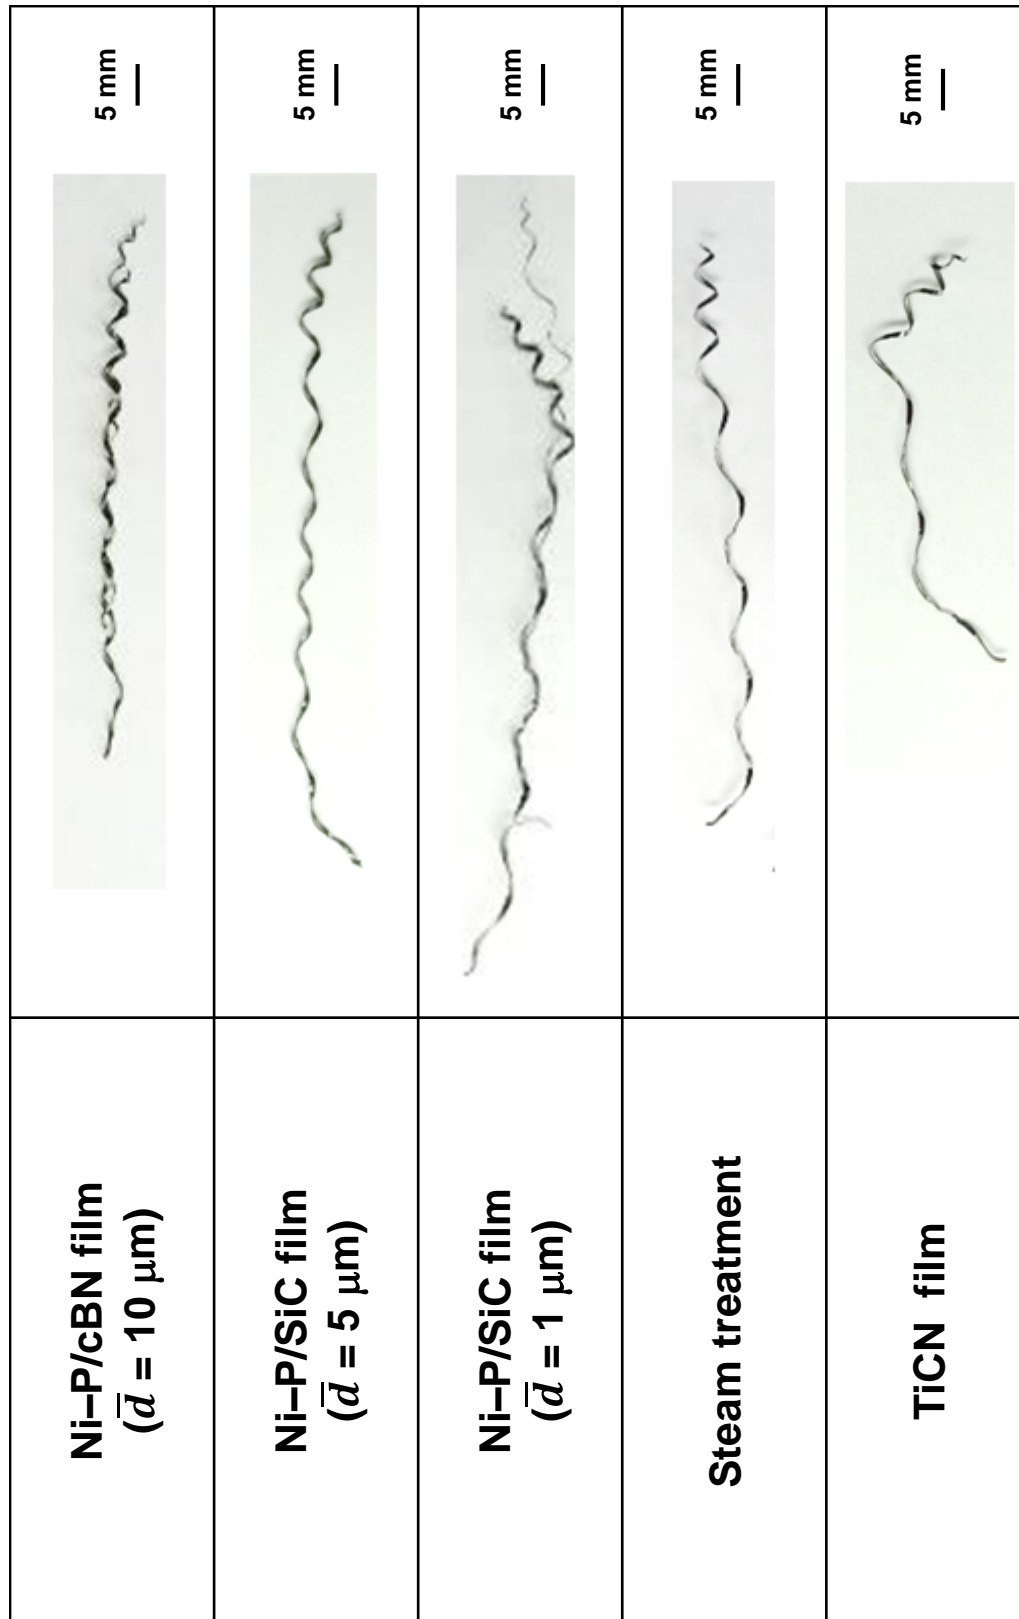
Cutting chip for the 4th cutting edge at 30 m/min
